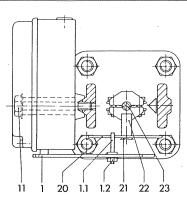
· Mounting on valve with cast-metal yoke (e.g. Series 240)
